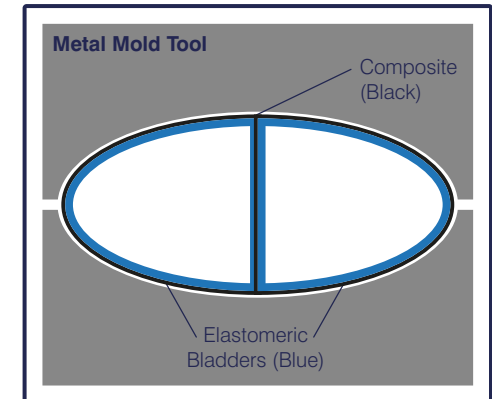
Multi-cavity bladder molding can be used to fabricate highly integrated complex composite structures.
